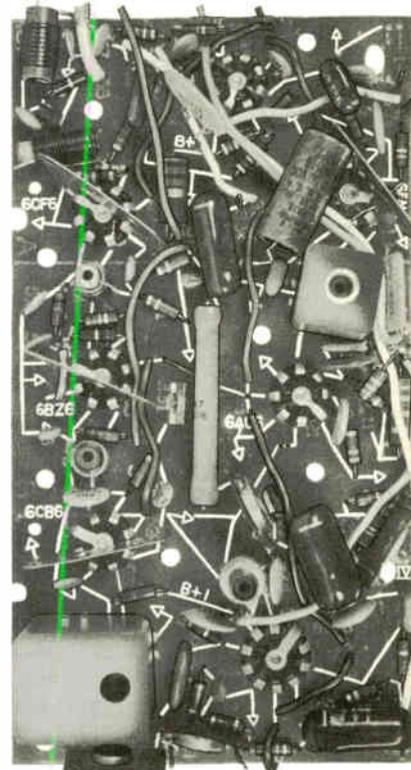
Component side of I-F board used in "M-5" line of General Electric TV receivers.
